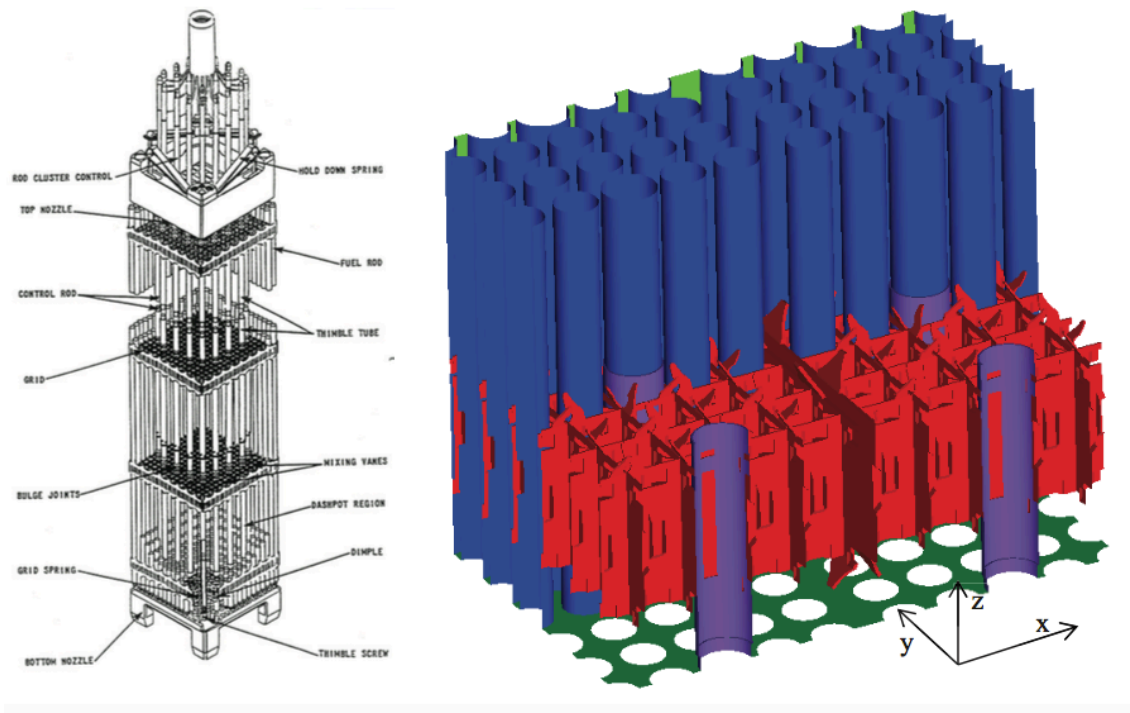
CAD Model of the geometry of a typical Fuel Assembly [8].
